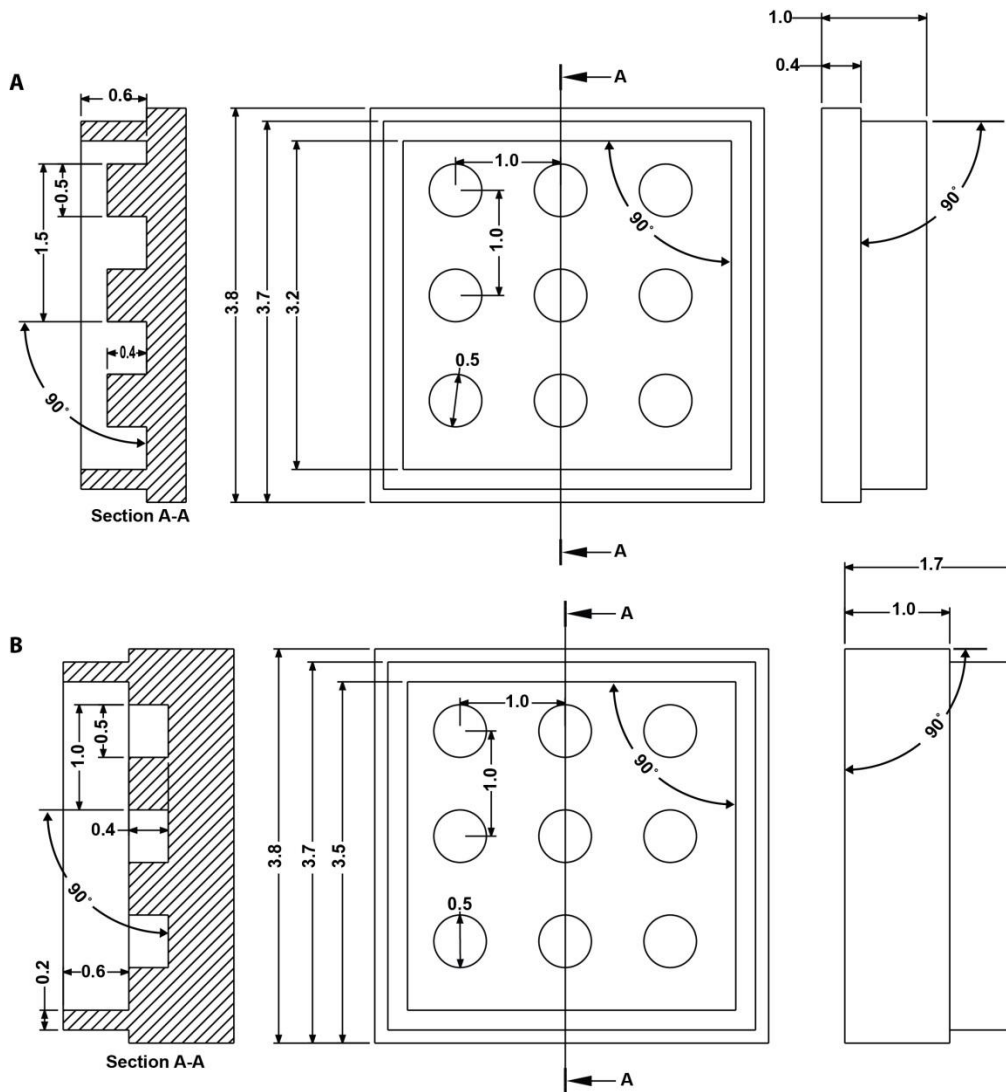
Technical drawings of the two masters we designed, fabricated, and used to mold the tiles needed to assemble cubes with double-taper dovetail joints. (A) Master for molding the top and bottom tiles of the cubes. (B) Master for molding two of the four side tiles of the cube. All dimensions are in centimeters.
